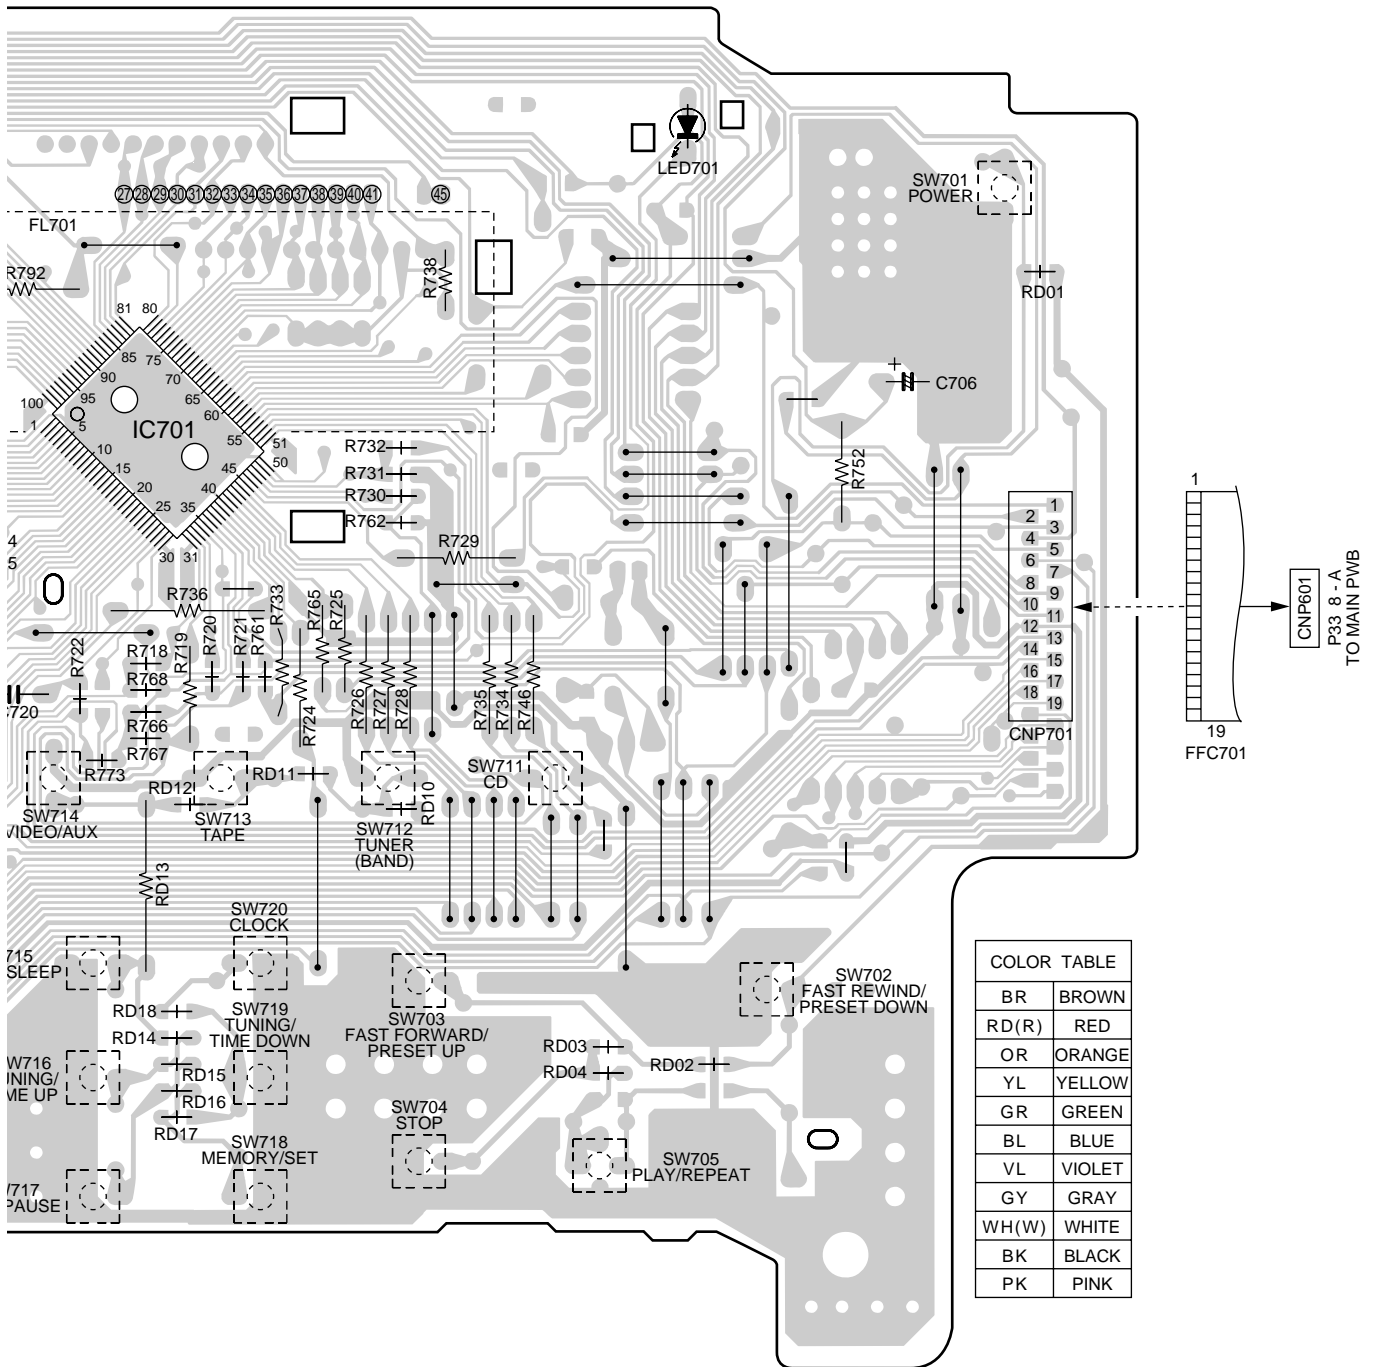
WIRING SIDE OF P.W.BOARD (4/7)
